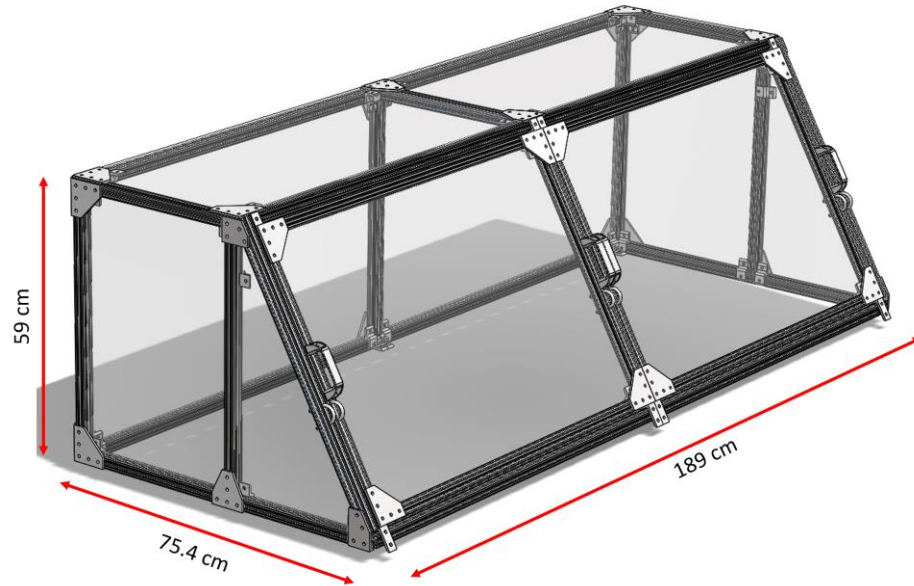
CAD Model of DAC Enclosure with Dimensions
